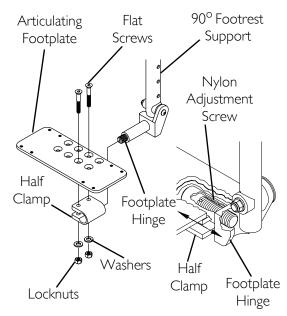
Installing Adjustable Angle Flip-up Footplate
